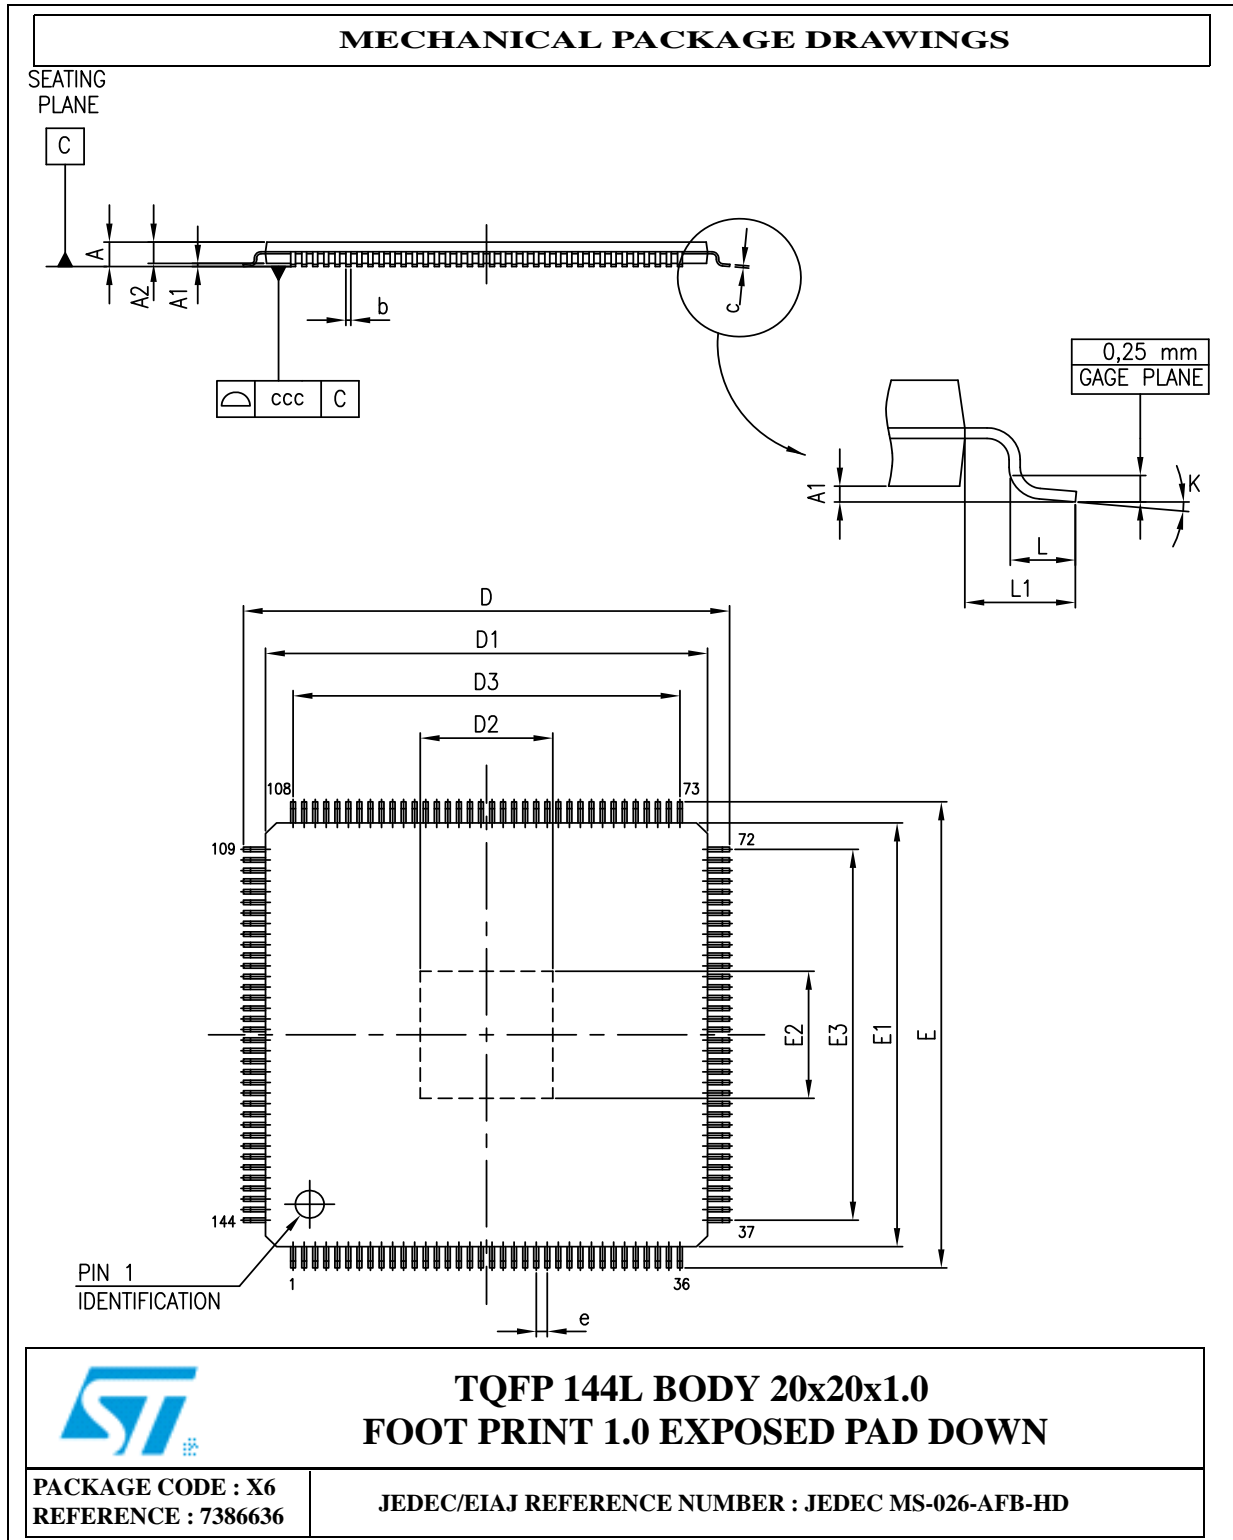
eTQFP144 – STMicroelectronics package mechanical drawing (2 of 2)
